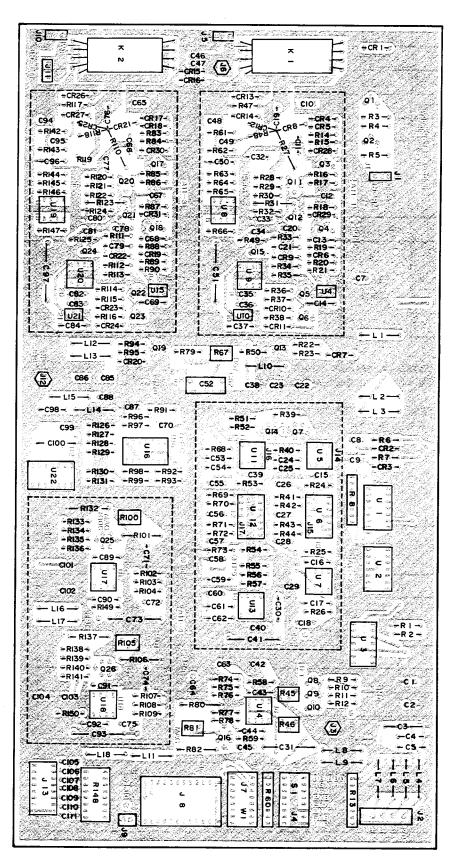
All Process Amplifier Board Assembly Component Locations.
